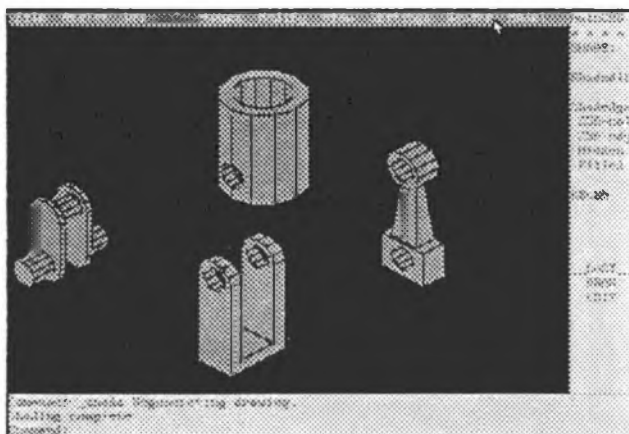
A SUBSET OF PARTS MODELED IN AUTOCAD
